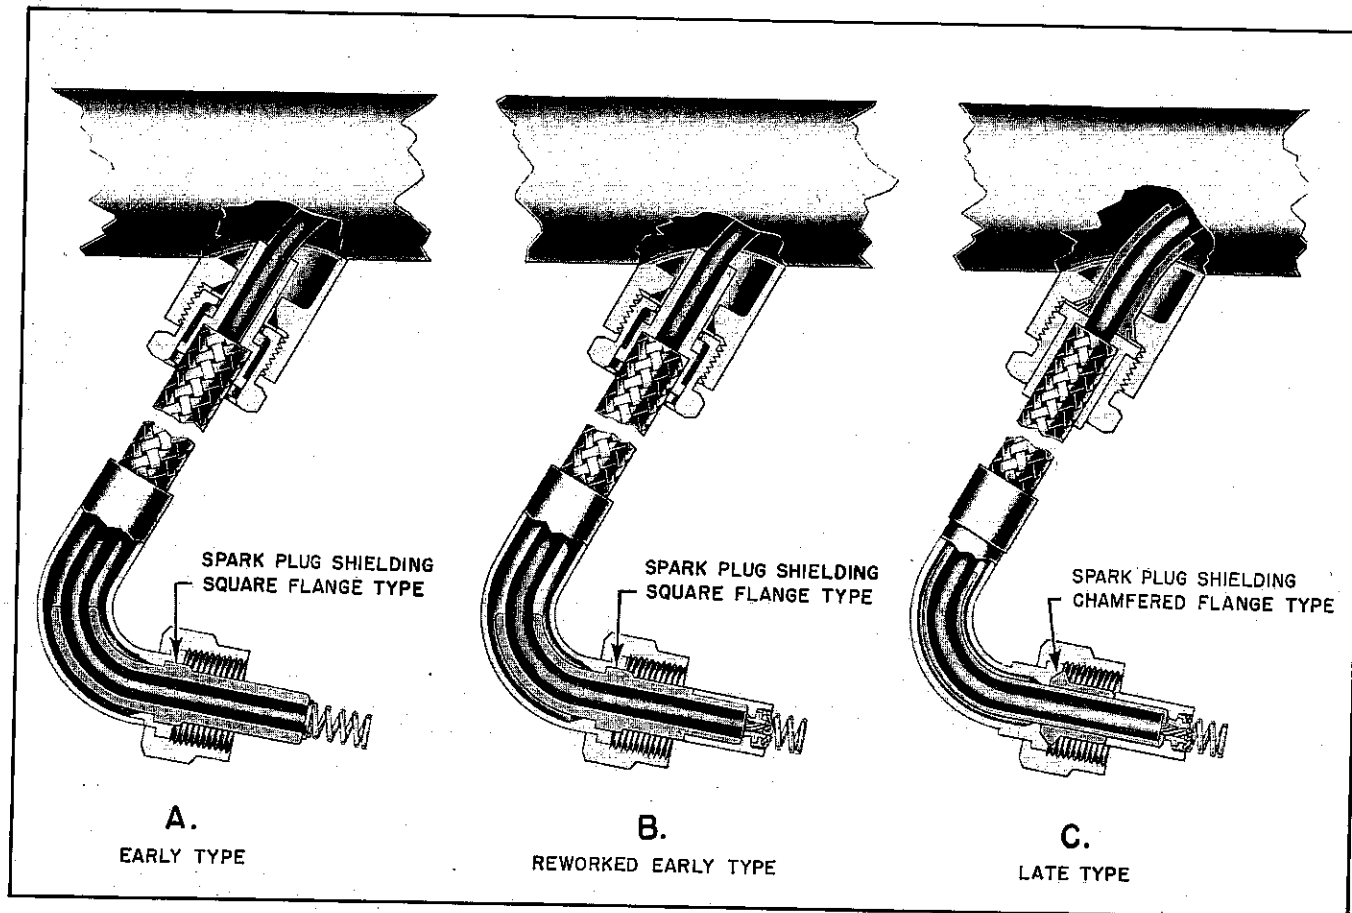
Intake Spark Plug Shielding Types and Methods of Wiring.
